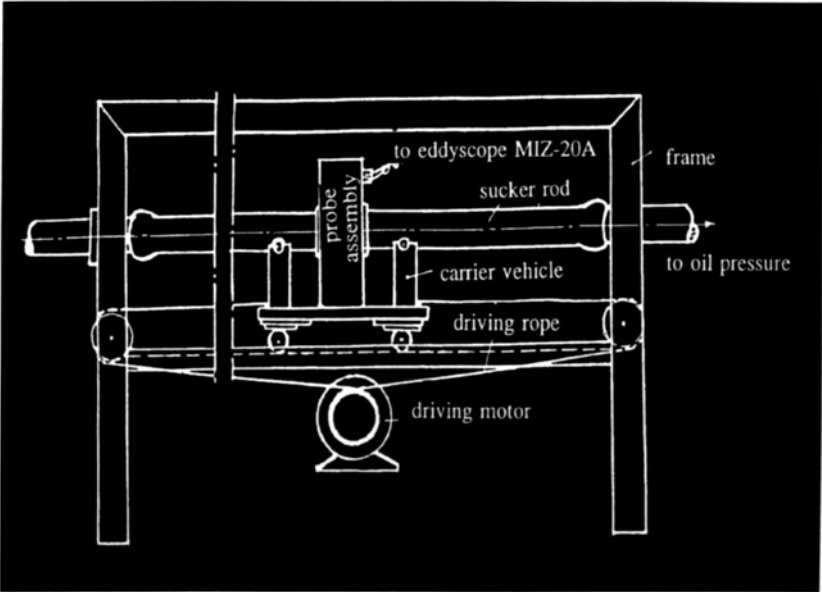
A scratch of the mechanical frame for sucker-rod inspection
